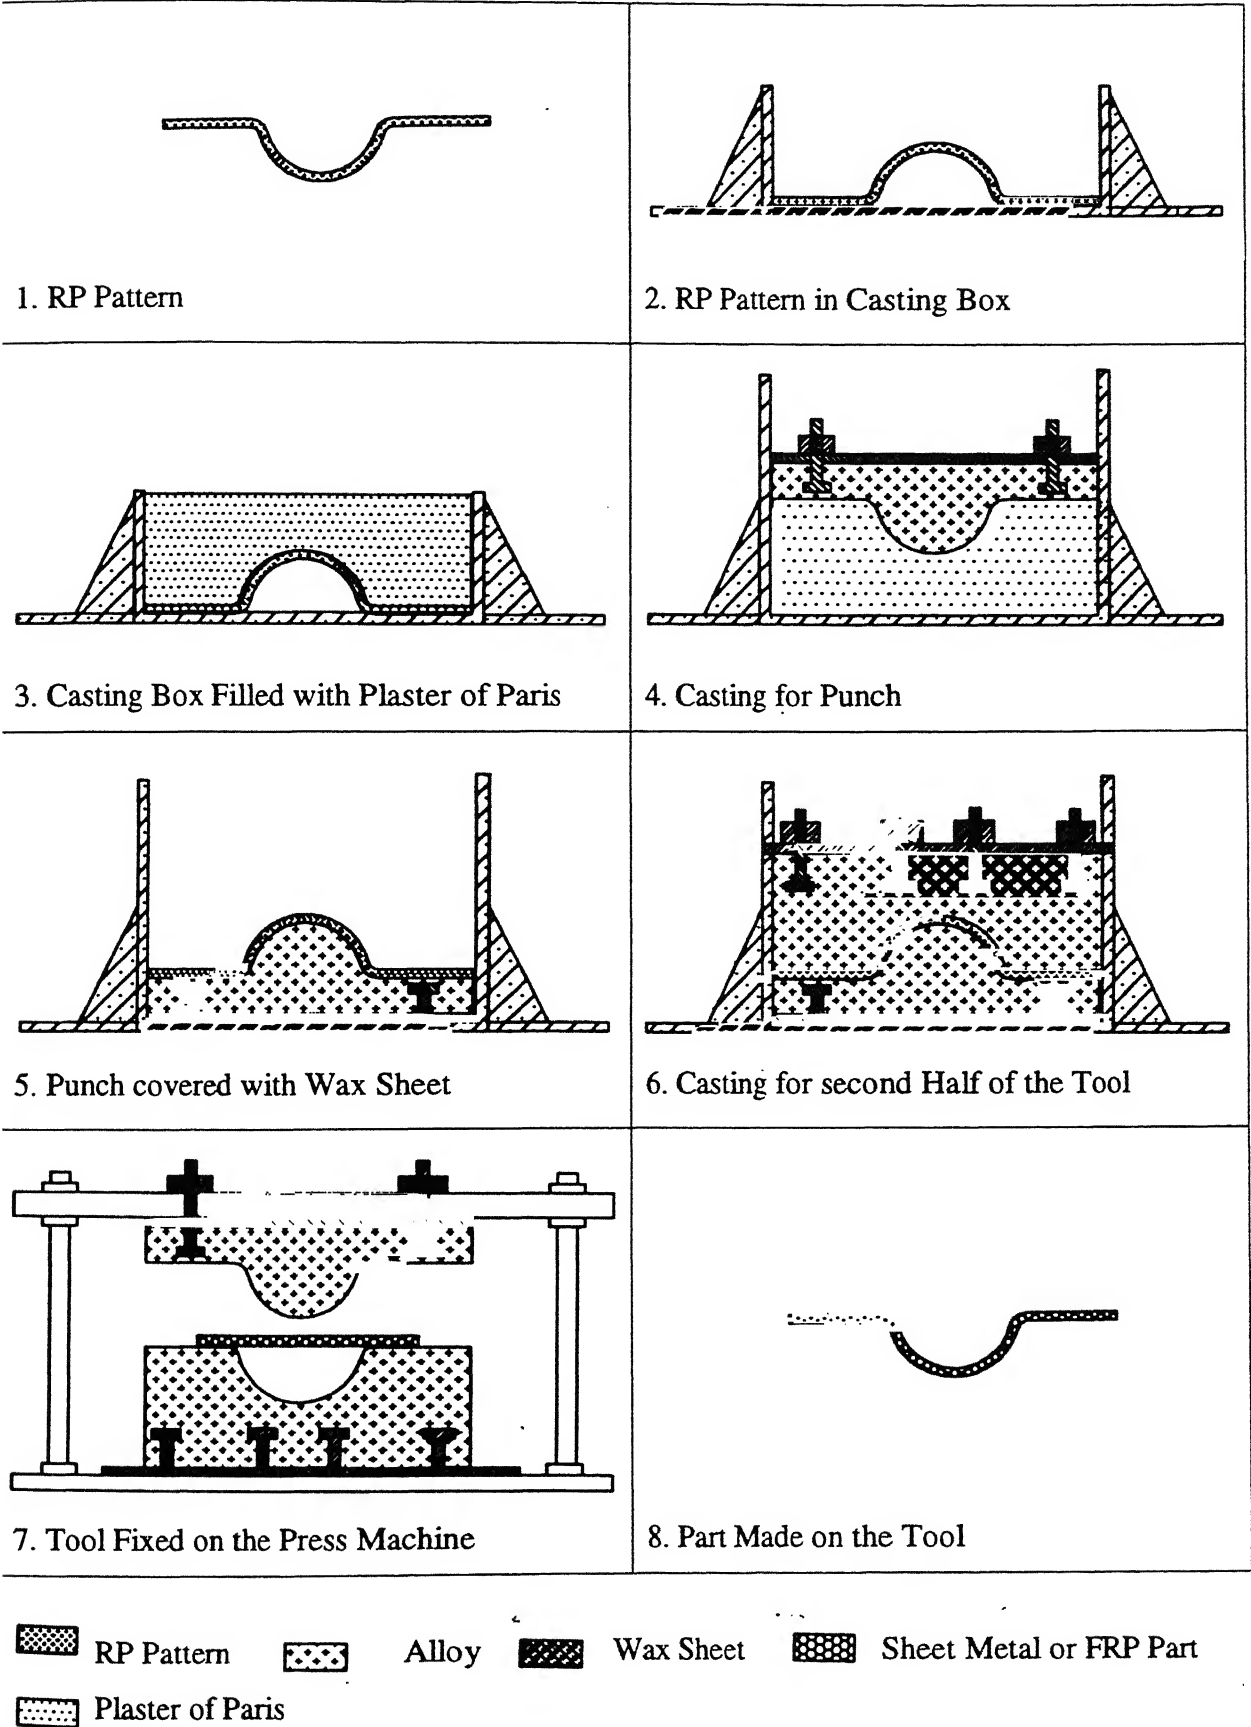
Process of making two-part Press-Tool using Waxesheet
